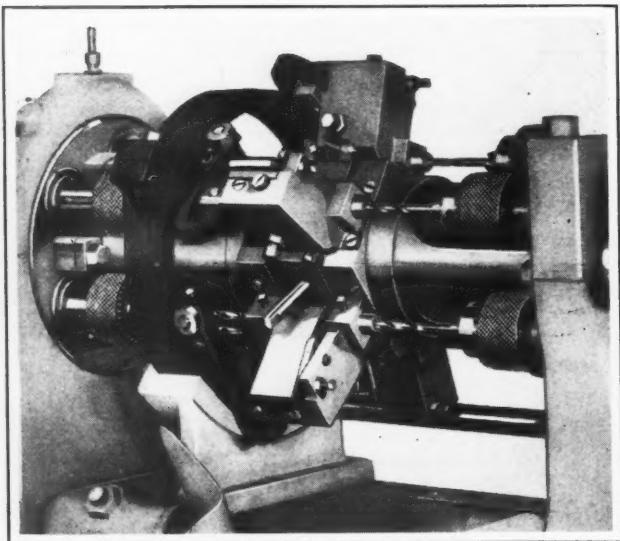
Close-up View, showing the Construction of the Jigs and Jig-holder provided for drilling Door Hinges
